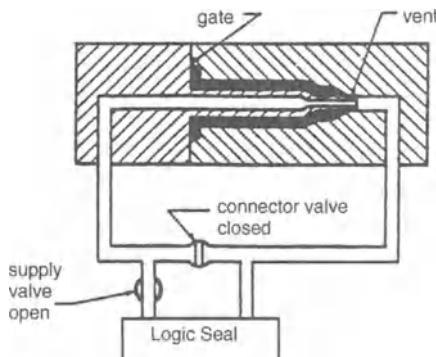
Water-transfer mold shown closed with coolant passing through the product. Before the mold opens, both valves shift and coolant is evacuated from the mold. Venting occurs at the tip of the core.
